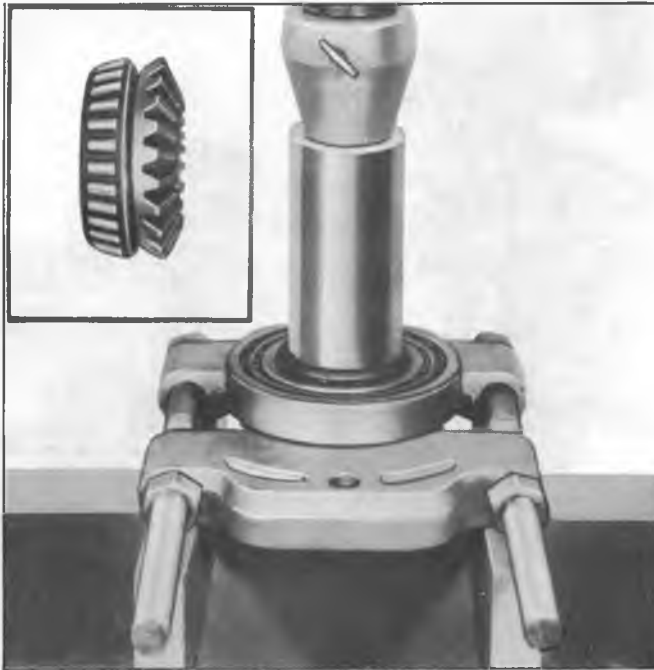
M—Removing Output Shaft Side Gear and Bearing
